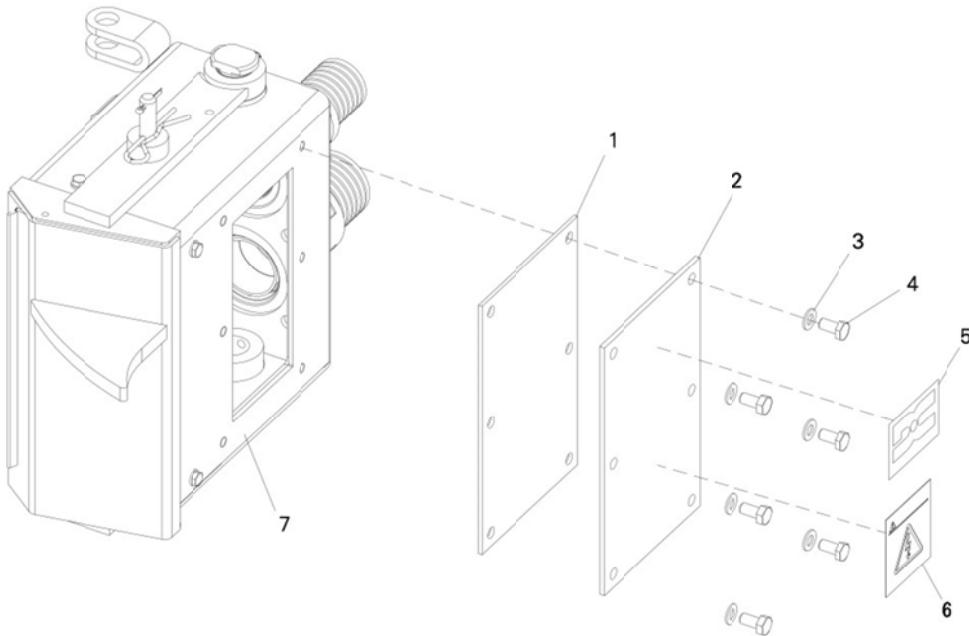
ELECTRICAL HEADS SIDE SEAL REPLACEMENT
